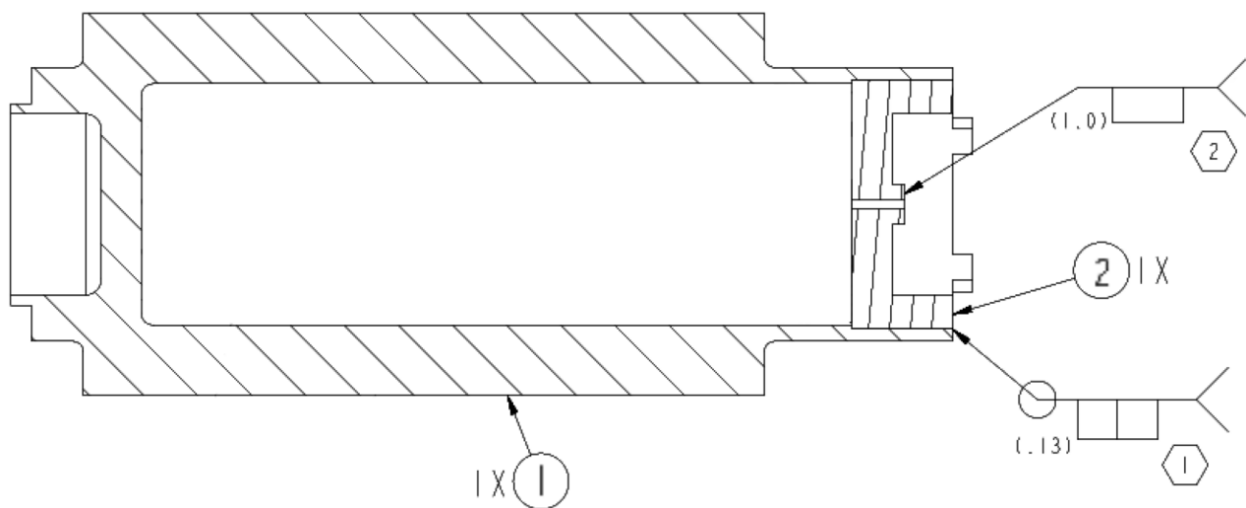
Engineering rendering of the MiniFuel subcapsule assembly, denoting welds.
